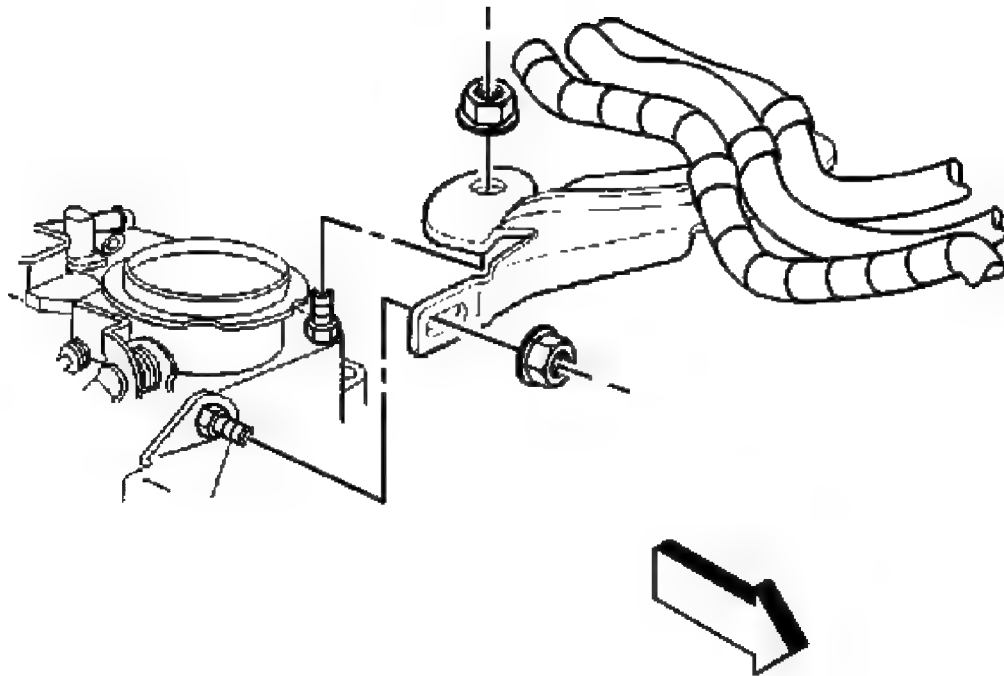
View Of Accelerator & Cruise Control Cable Bracket
